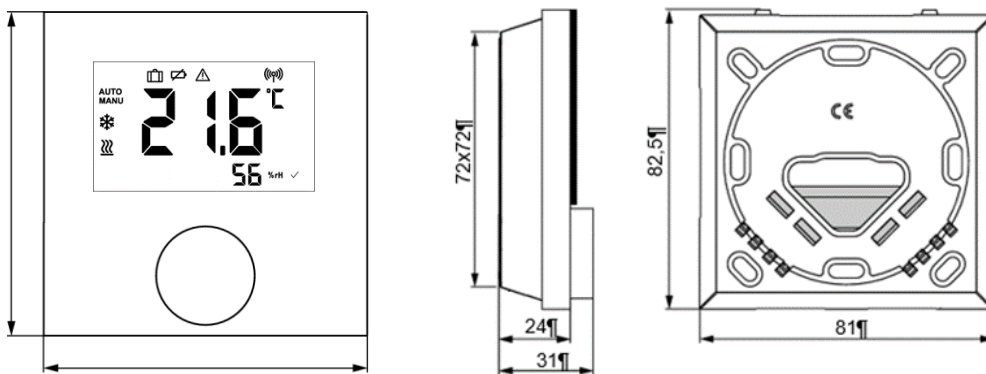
Dimensions Room Control Unit Display and external sensor (in mm)
